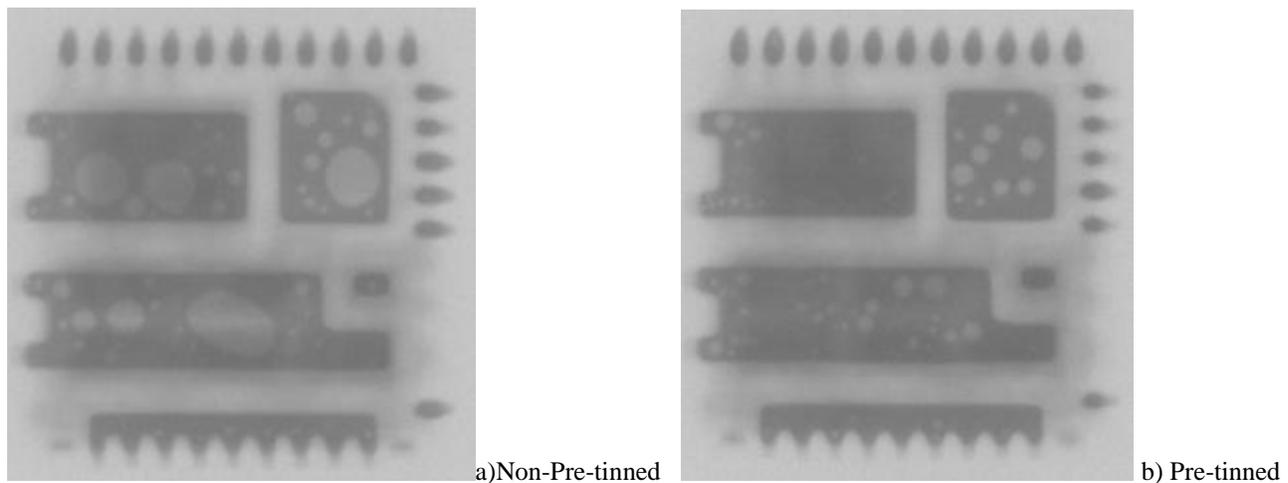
X-Ray Images of QFN 3550 Solder Joint Assembled with Non-Pre-tinned Component vs. Pre-tinned Component.
